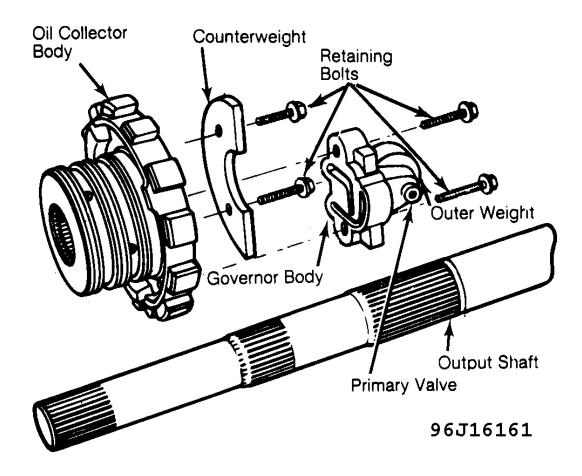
Exploded View of Governor Assembly Courtesy of FORD MOTOR CO.
